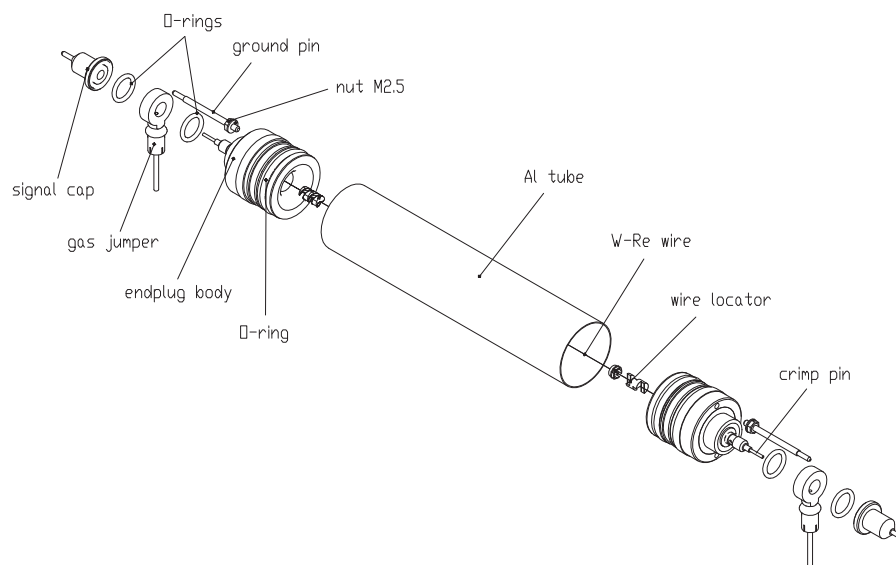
Exploded view of an Atlas Monitored Drift Tube [16].
